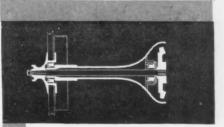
Housing and axle shaft divide job of supporting and holding wheel in a 3/4-floating axle. A bearing carries part of the load
